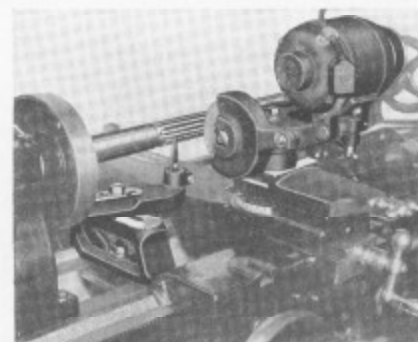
Sharpening a Straight Reamer using a Grinding Attachment on the Lathe.
